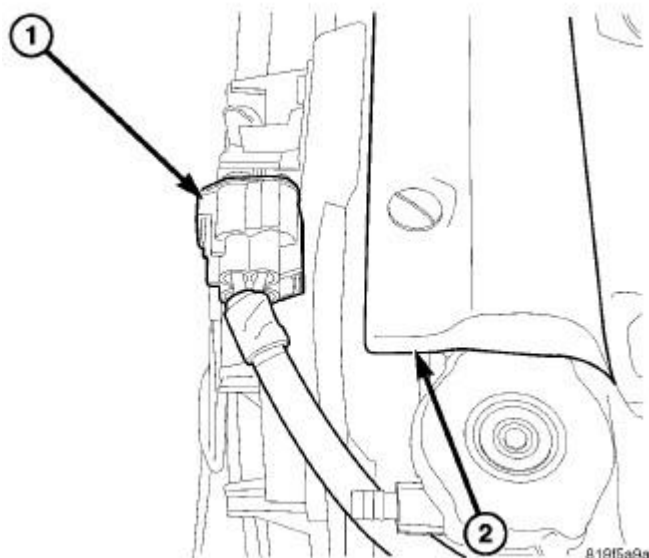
Radiator Fan Electrical Connector & Upper Radiator Seal
